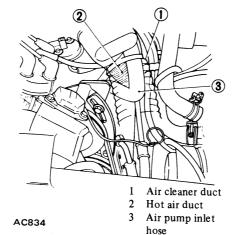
Removing air cleaner duct, hot air duct and air pump inlet hose
